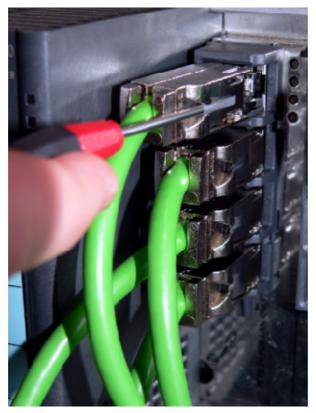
Unlocking the FastConnect RJ-45 plug
